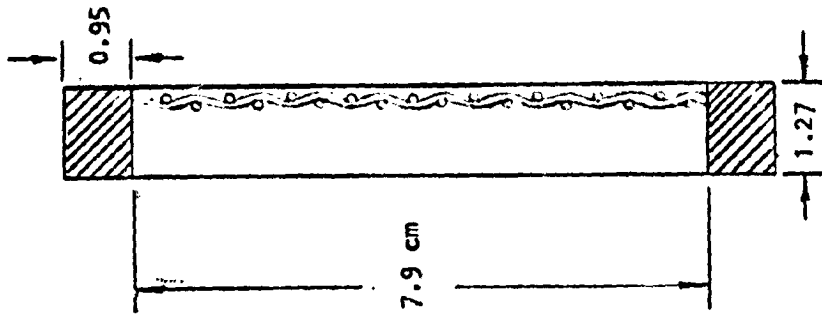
FLAMEHOLDER MOUNTING IN TEST RIG
